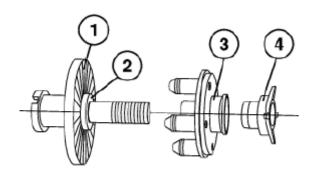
Identifying Wheel Disc On Wheel Balancing Machine Courtesy of BMW OF NORTH AMERICA, INC.
